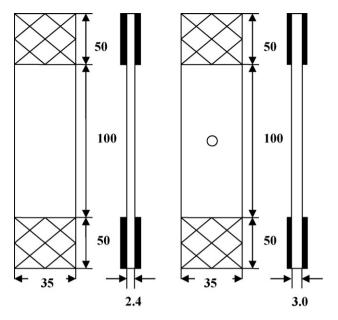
Specimen geometry (all the dimensions are in mm) (a) QI laminate (b) 0° FD laminate with a hole.
